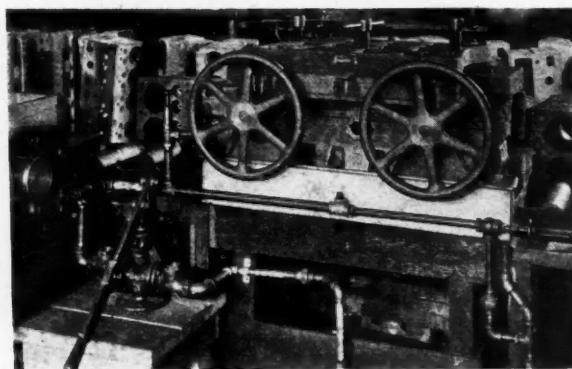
The cylinder block water testing fixture is directly in line with the roller conveyor; as the blocks advance to this operation they pass into the fixtures to a stop which properly locates the block in the fixture
